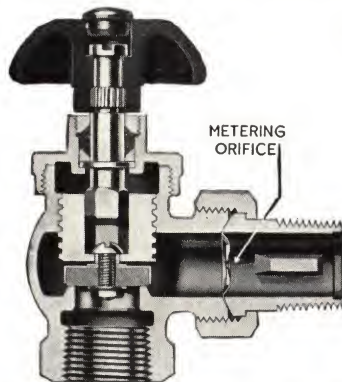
Cup-type Metering Orifice Used in Radiator Supply Valve
